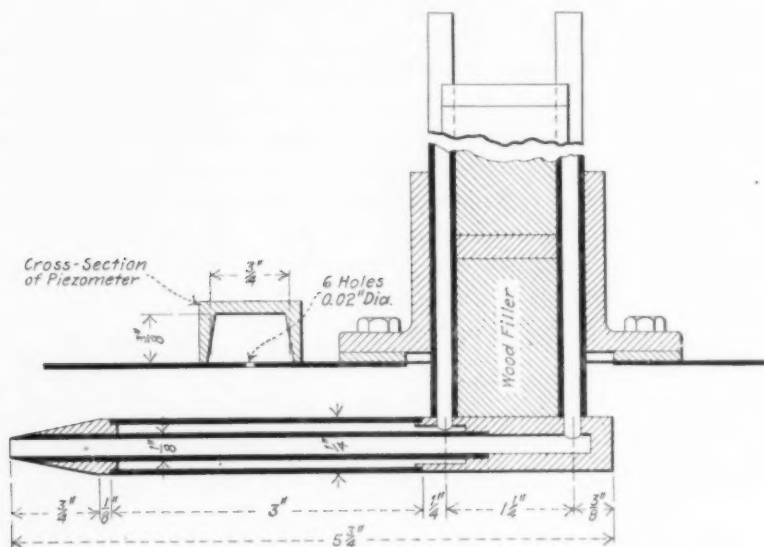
DIMENSIONED SKETCH OF PITOT TUBES A TO H
